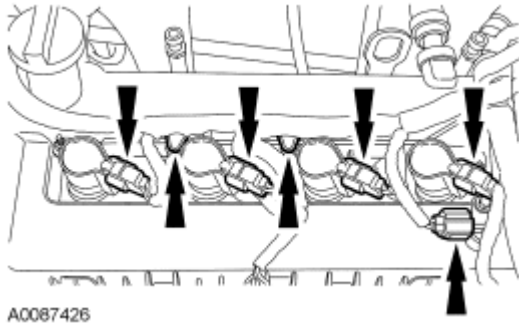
Locating Camshaft Position Sensor Electrical Connectors And Coil-On-Plug
